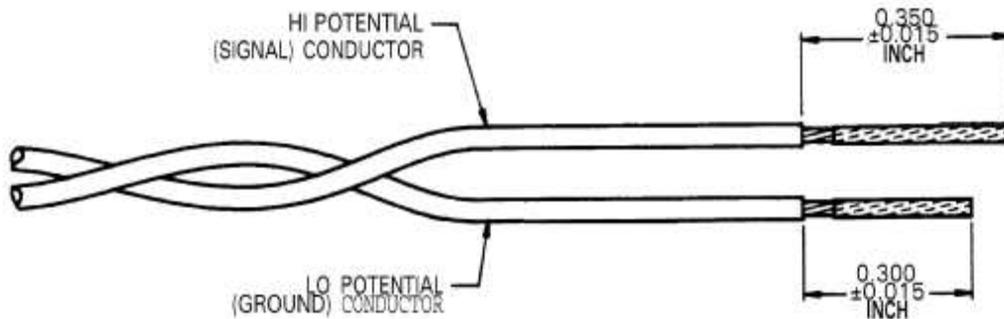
Trimming Dimensions for Twisted Pair Cables
